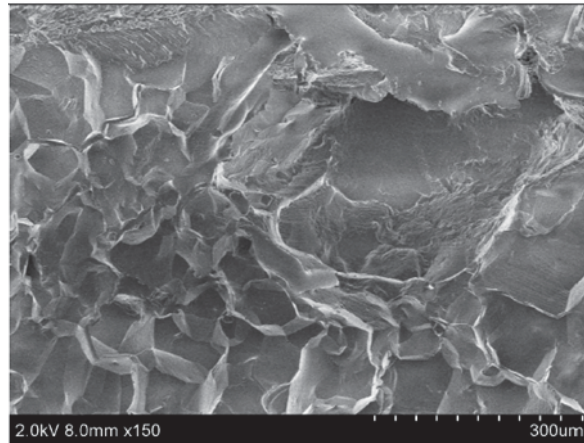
R1.1, 0° position, local transgranular area attributed to final fracture.
